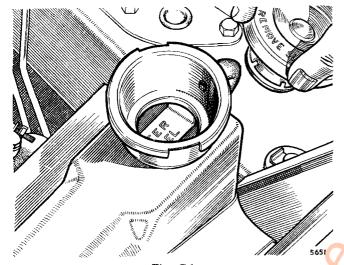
The filler cap of the sealed cooling system removed, showing the water level indicator
